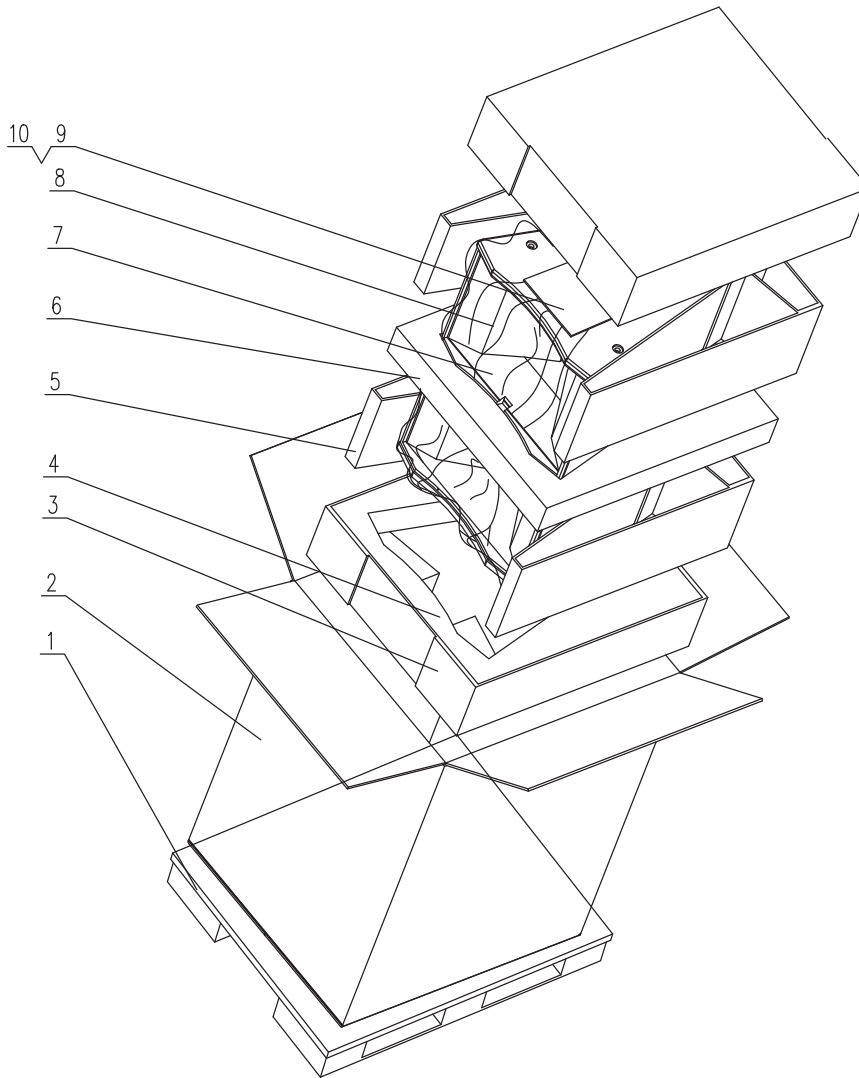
Panaray LT 9402 WR Loudspeaker Packaging View
